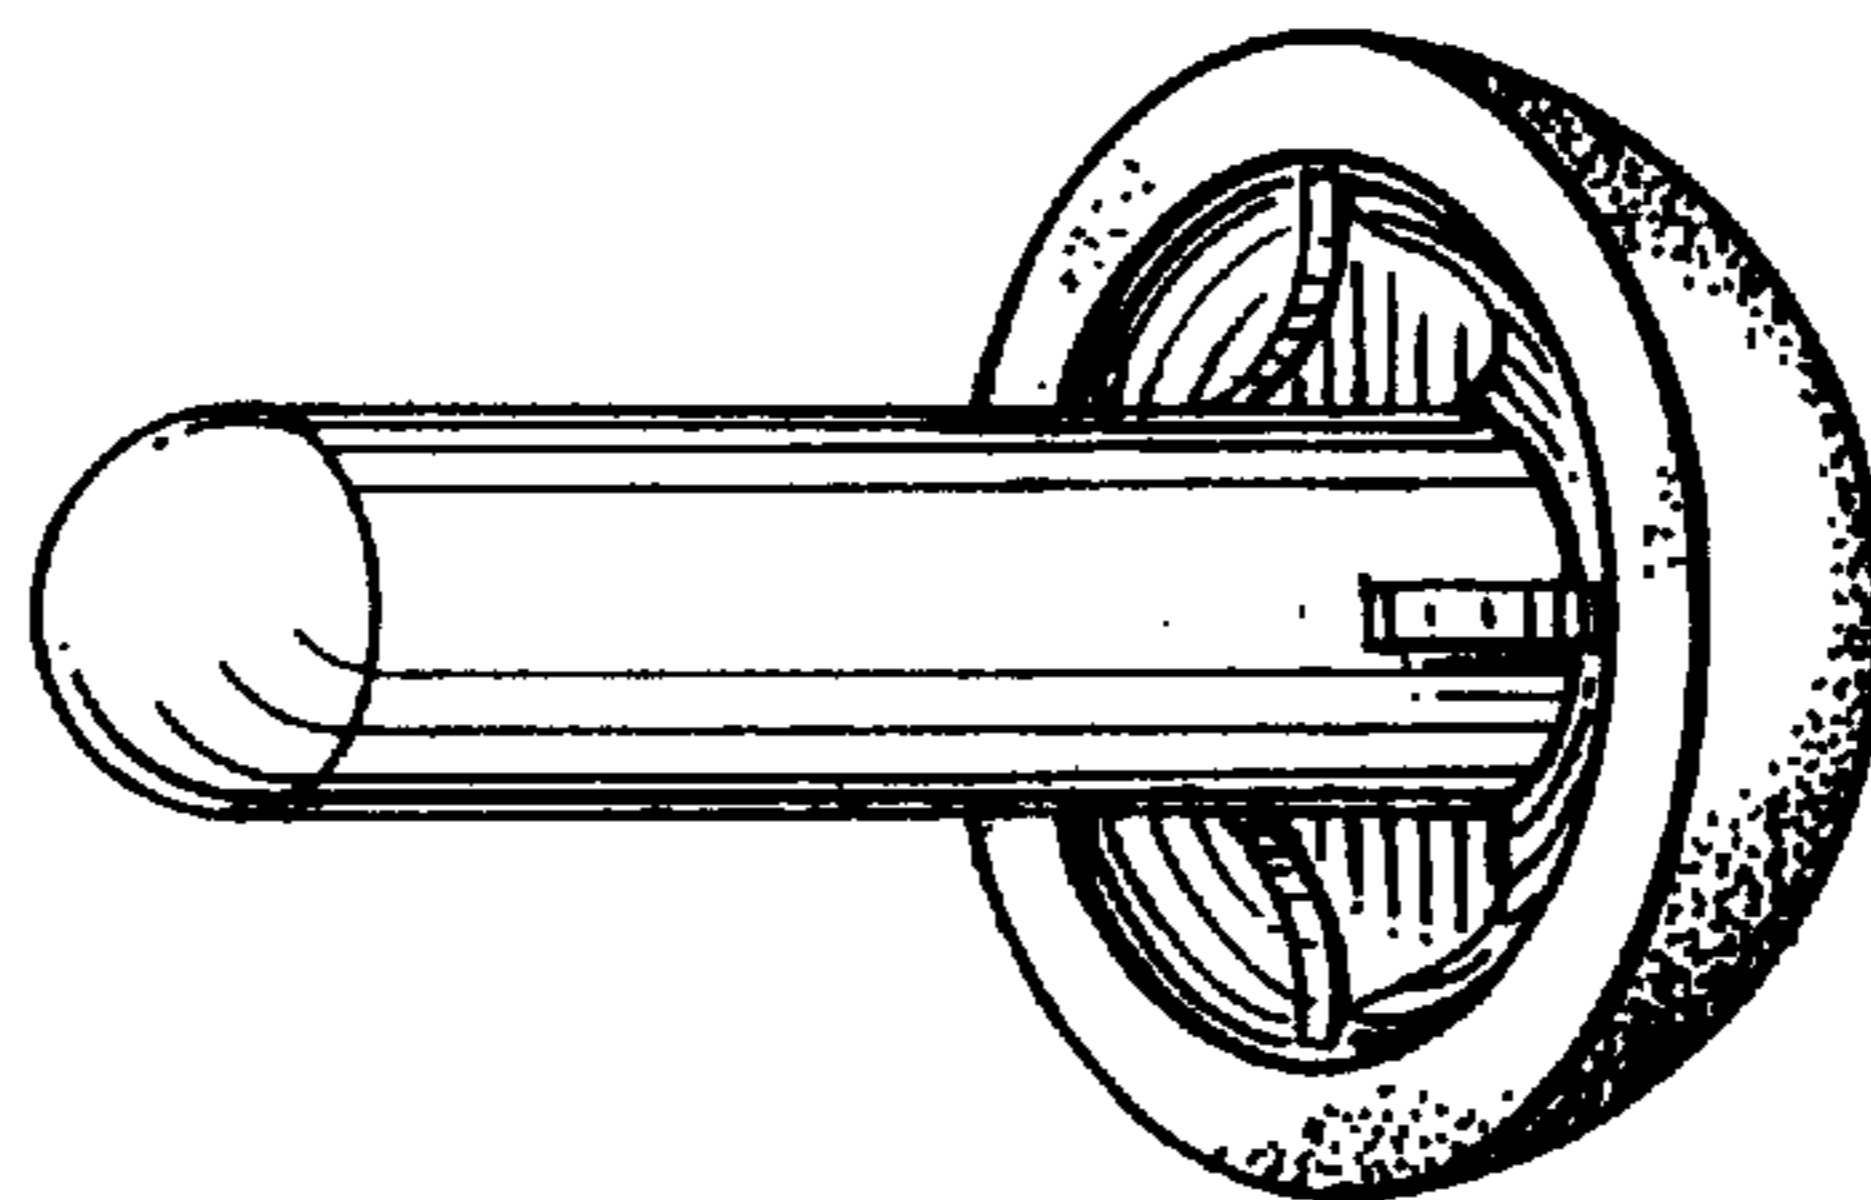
is a rear perspective view of a fourth embodiment of the hearing protection device;
